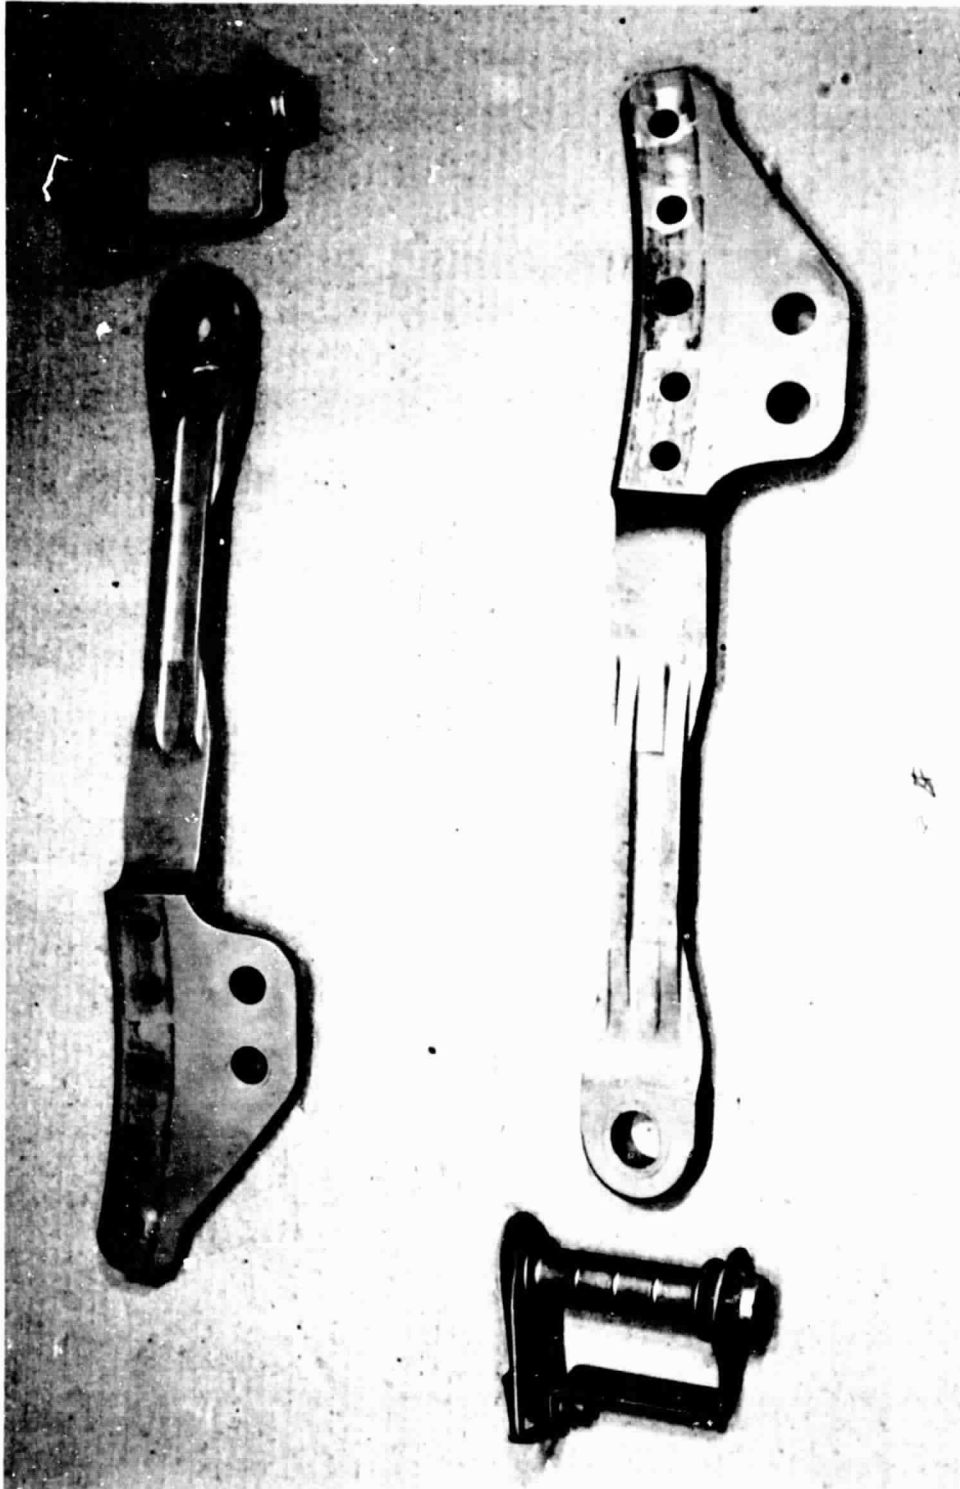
New Front Mount Left and Right Side Links and Attachment Bolts from Engine 455-508 After 204 Hours.
